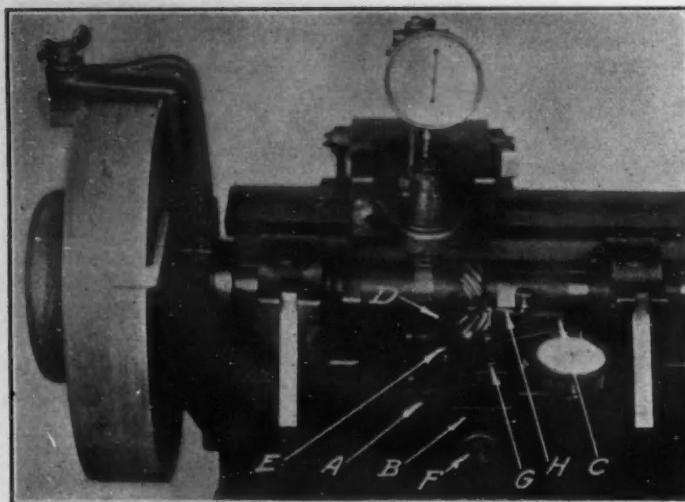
Fixture used for checking the spiral gear on the camshaft and its mating gear on the oil-pump as well as for ordinary camshaft inspection
